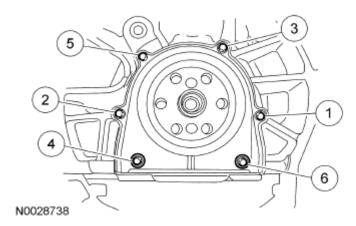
Identifying Crankshaft Rear Main Oil Seal Installer Courtesy of FORD MOTOR CO.
